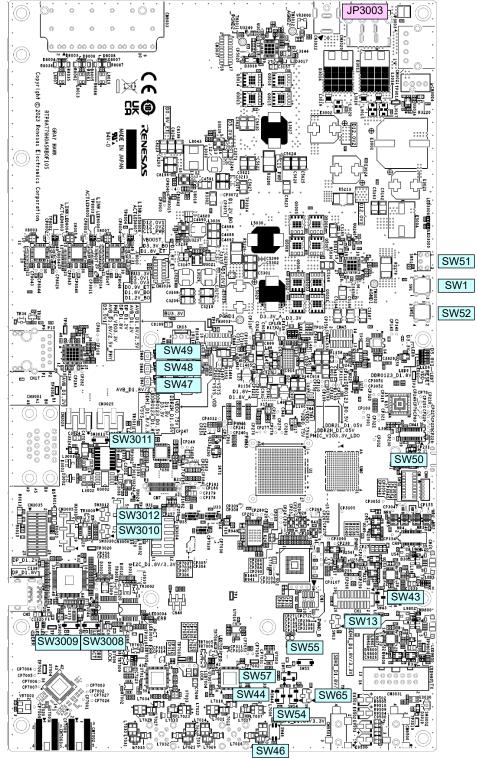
Location of Switches on the Gray Hawk Single Board (Component Side)
